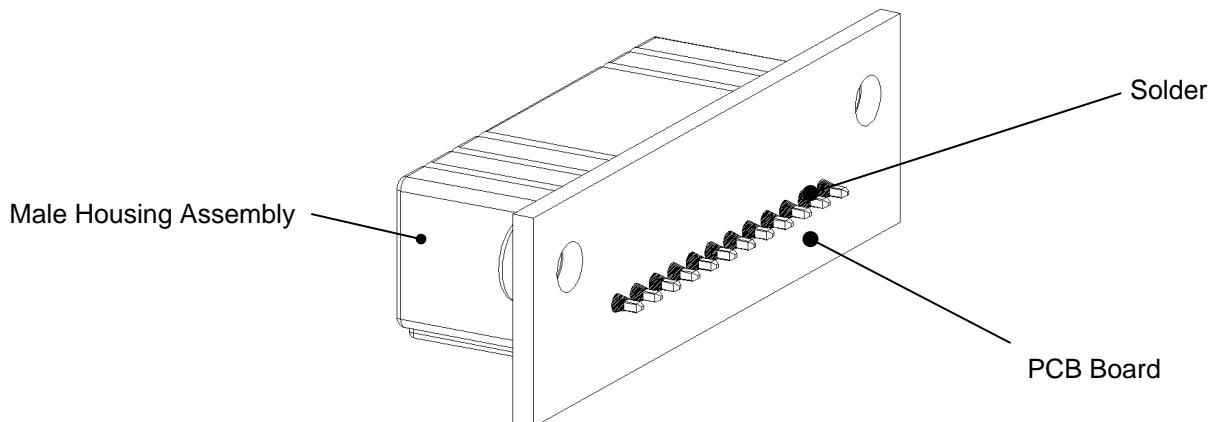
Placing the Male Assembly on the PCB Board (e.g. 12 positions)
